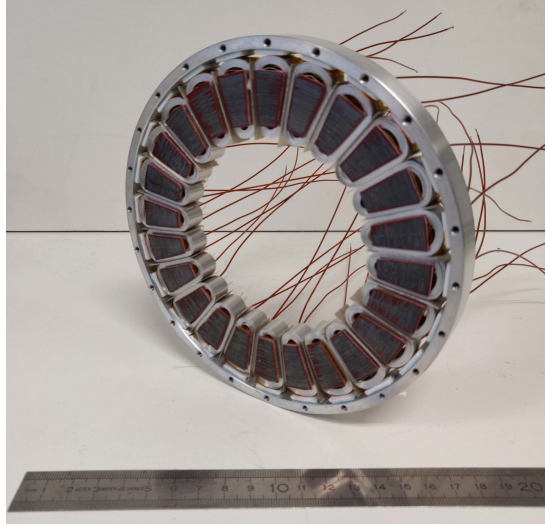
Prototype axial flux machine stator with anodized aluminum foil tooth coils (before potting)
